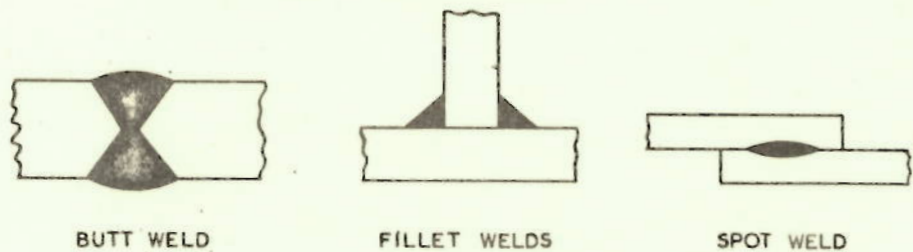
TYPICAL WELDED CONNECTIONS
